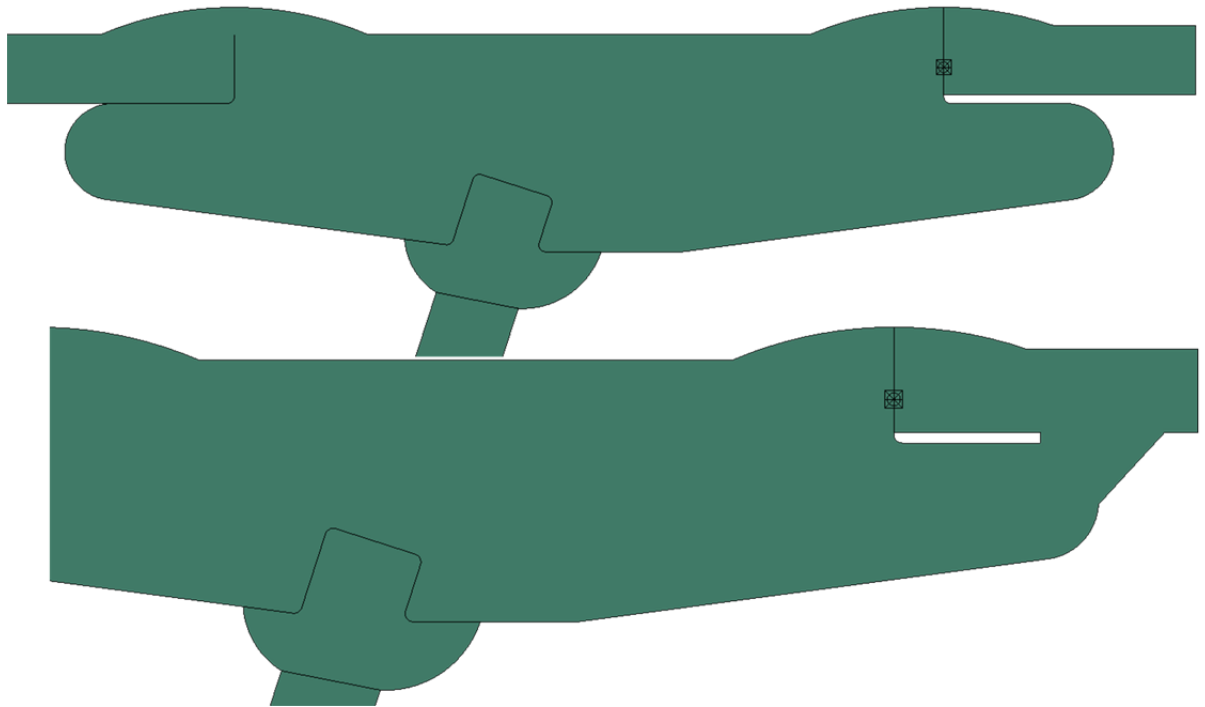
Illustration of the geometry for Case 09 (the average dimension model) with and without the additional internal fillet weld.
